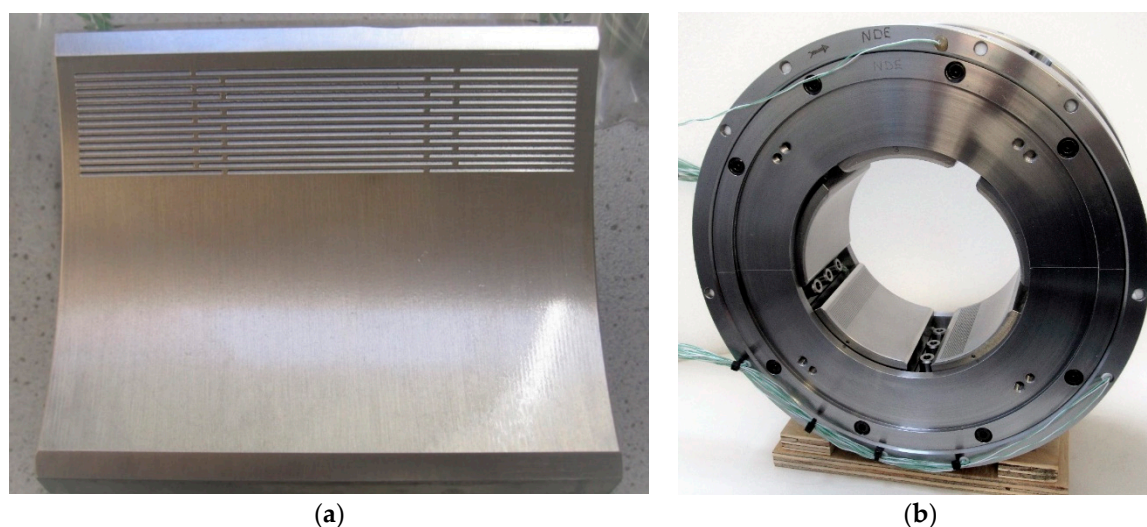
(a) Pad with eddy groove arrangement and (b) assembled test bearing.
